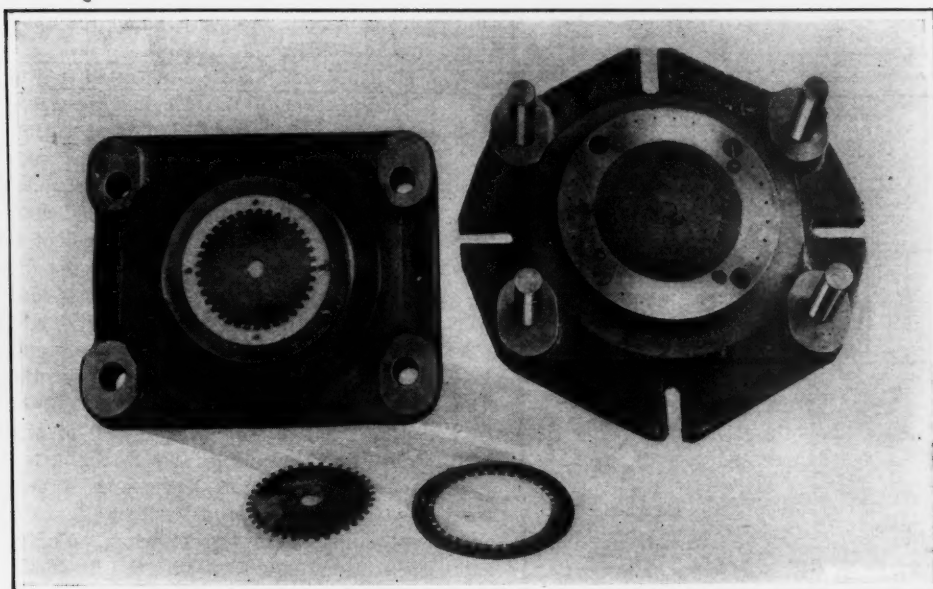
Full Compound Blanking Die for producing Motor Stator Punchings
